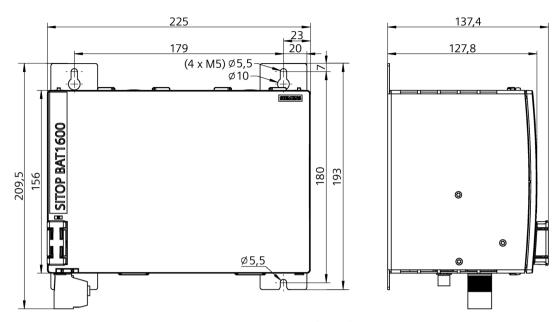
Dimension drawing 6EP4135-0GE00-0AY0 (12 Ah)
